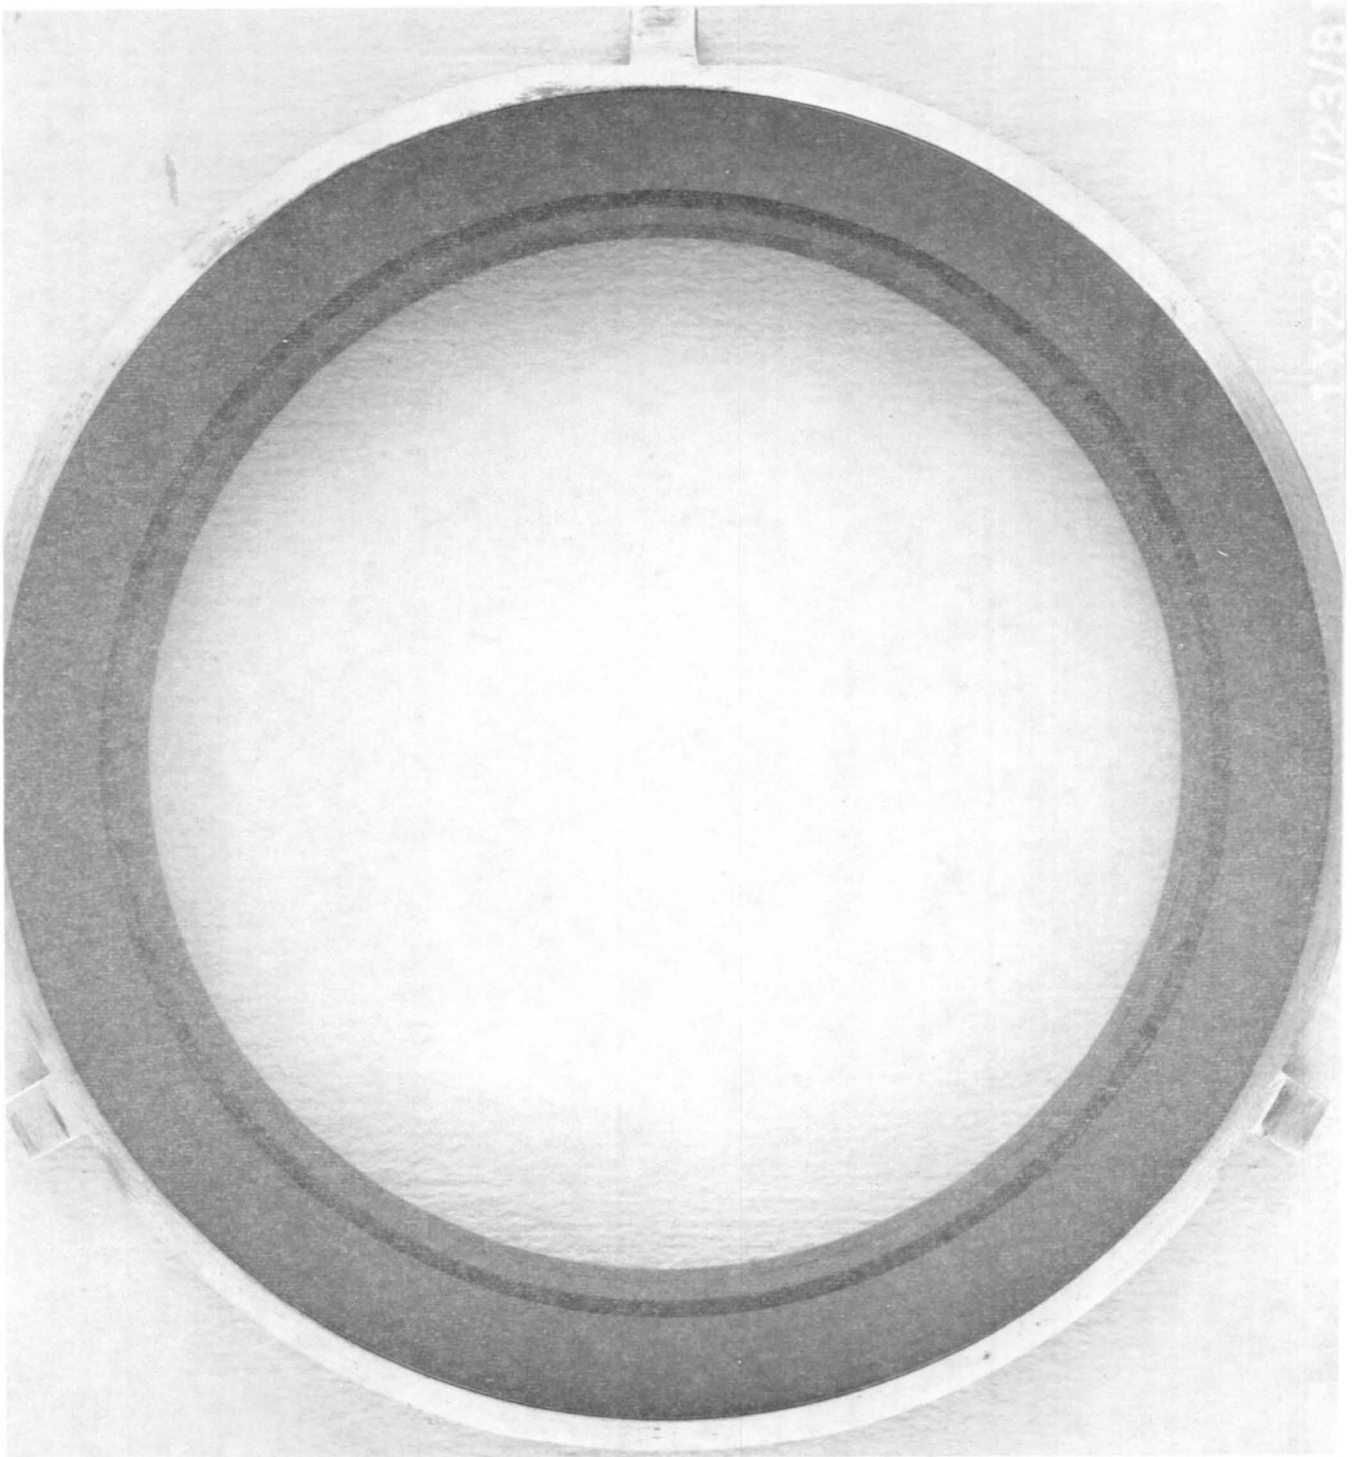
Phase V Pressure Balanced Spiral Groove Carbon Seal Ring
